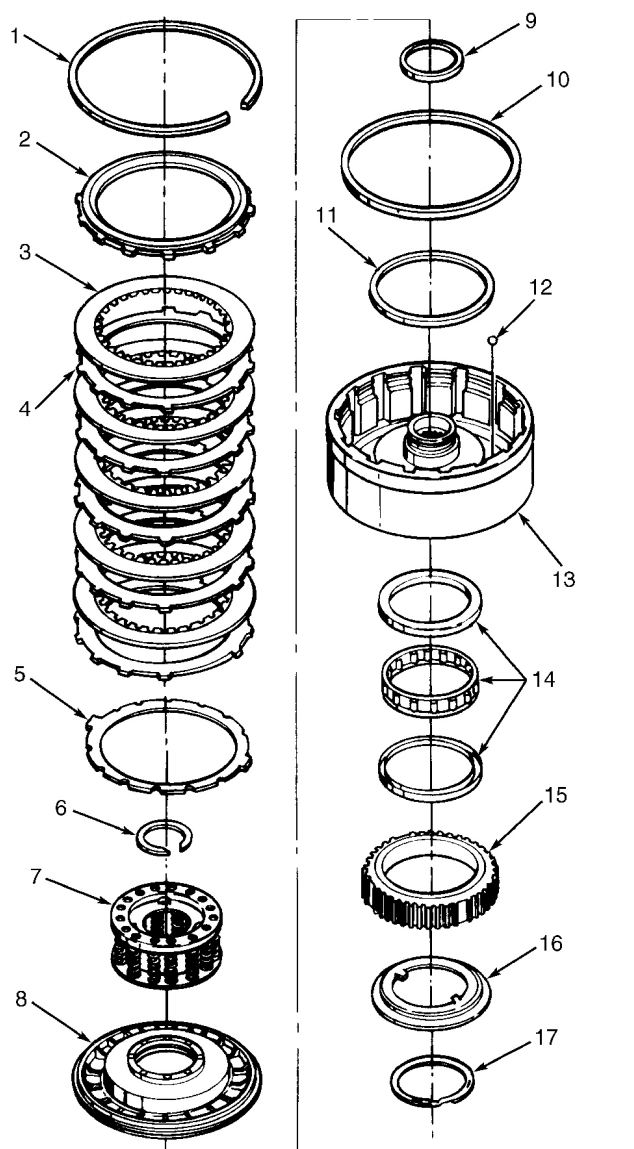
Input Sprag & 3rd Roller Clutch Assemblies (4 of 4)
